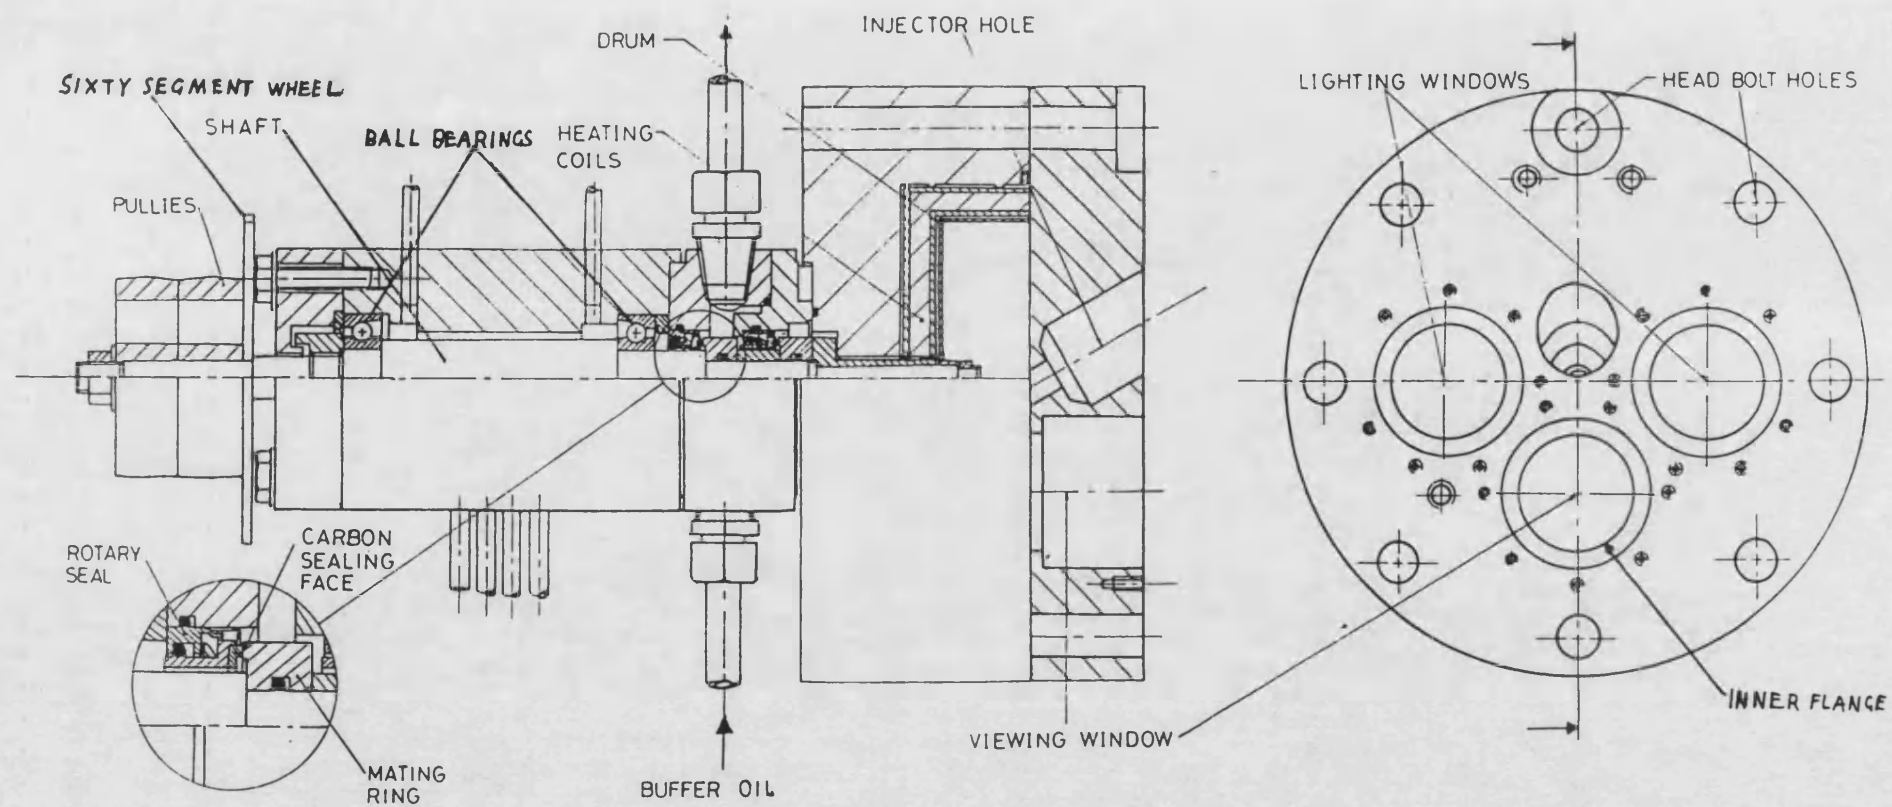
SECTION OF COMBUSTION CHAMBER, DRUM DRIVE
